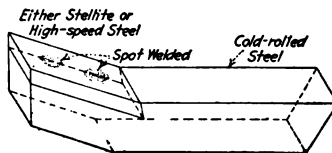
METHOD OF SPOTTING THE HIGH-SPEED STEEL
